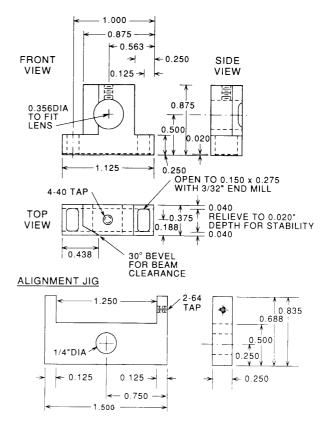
Collimating lens mount and alignment jig machine drawing. Dimensions are in inches.
